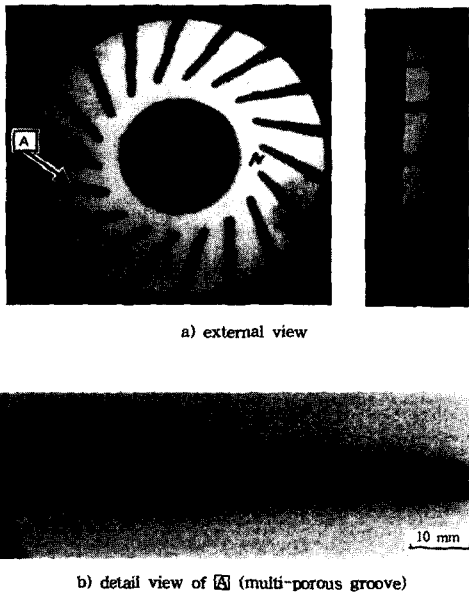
The developed discontinuous grinding wheel with multi-porous grooves.
